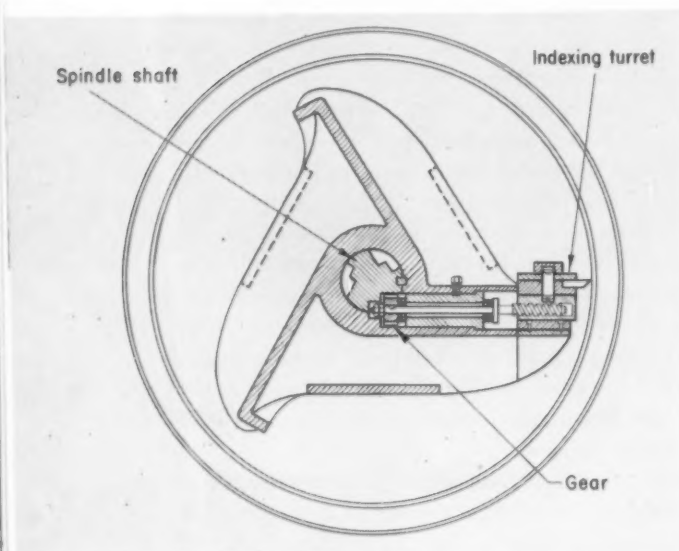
Cross sectional view of cathead mechanism which translates axial spindle movement into radial turret movement along cathead arms.
